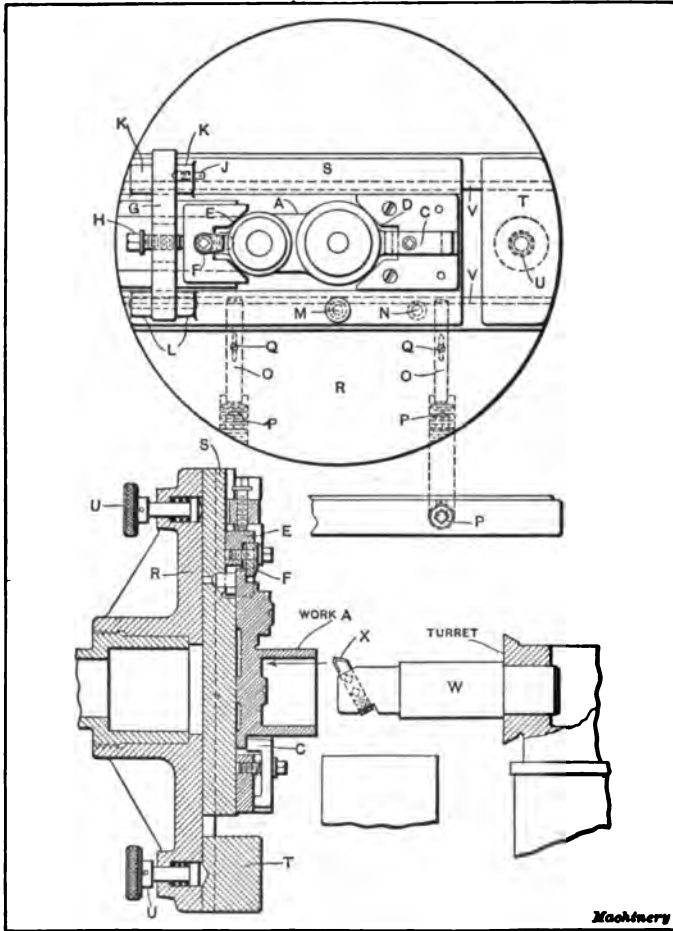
Fixture with Adjustable Slide and Counterbalance
